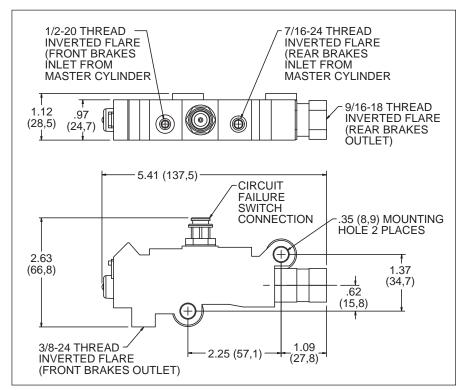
Combination Proportioning Valve, Mounting Dimensions
